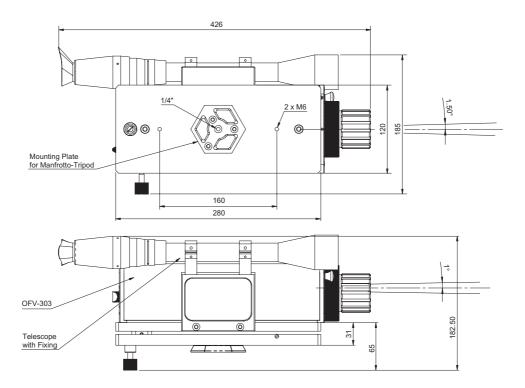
Bottom view and side view of the OFV-P5 with fitted targeting telescope and sensor head. All dimensions are given in mm.
